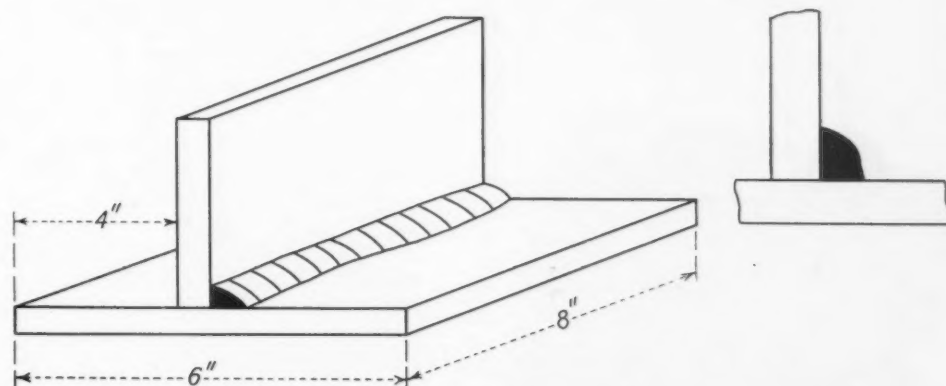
Procedure for fillet weld in the overhead position with flux coated position type electrodes.
